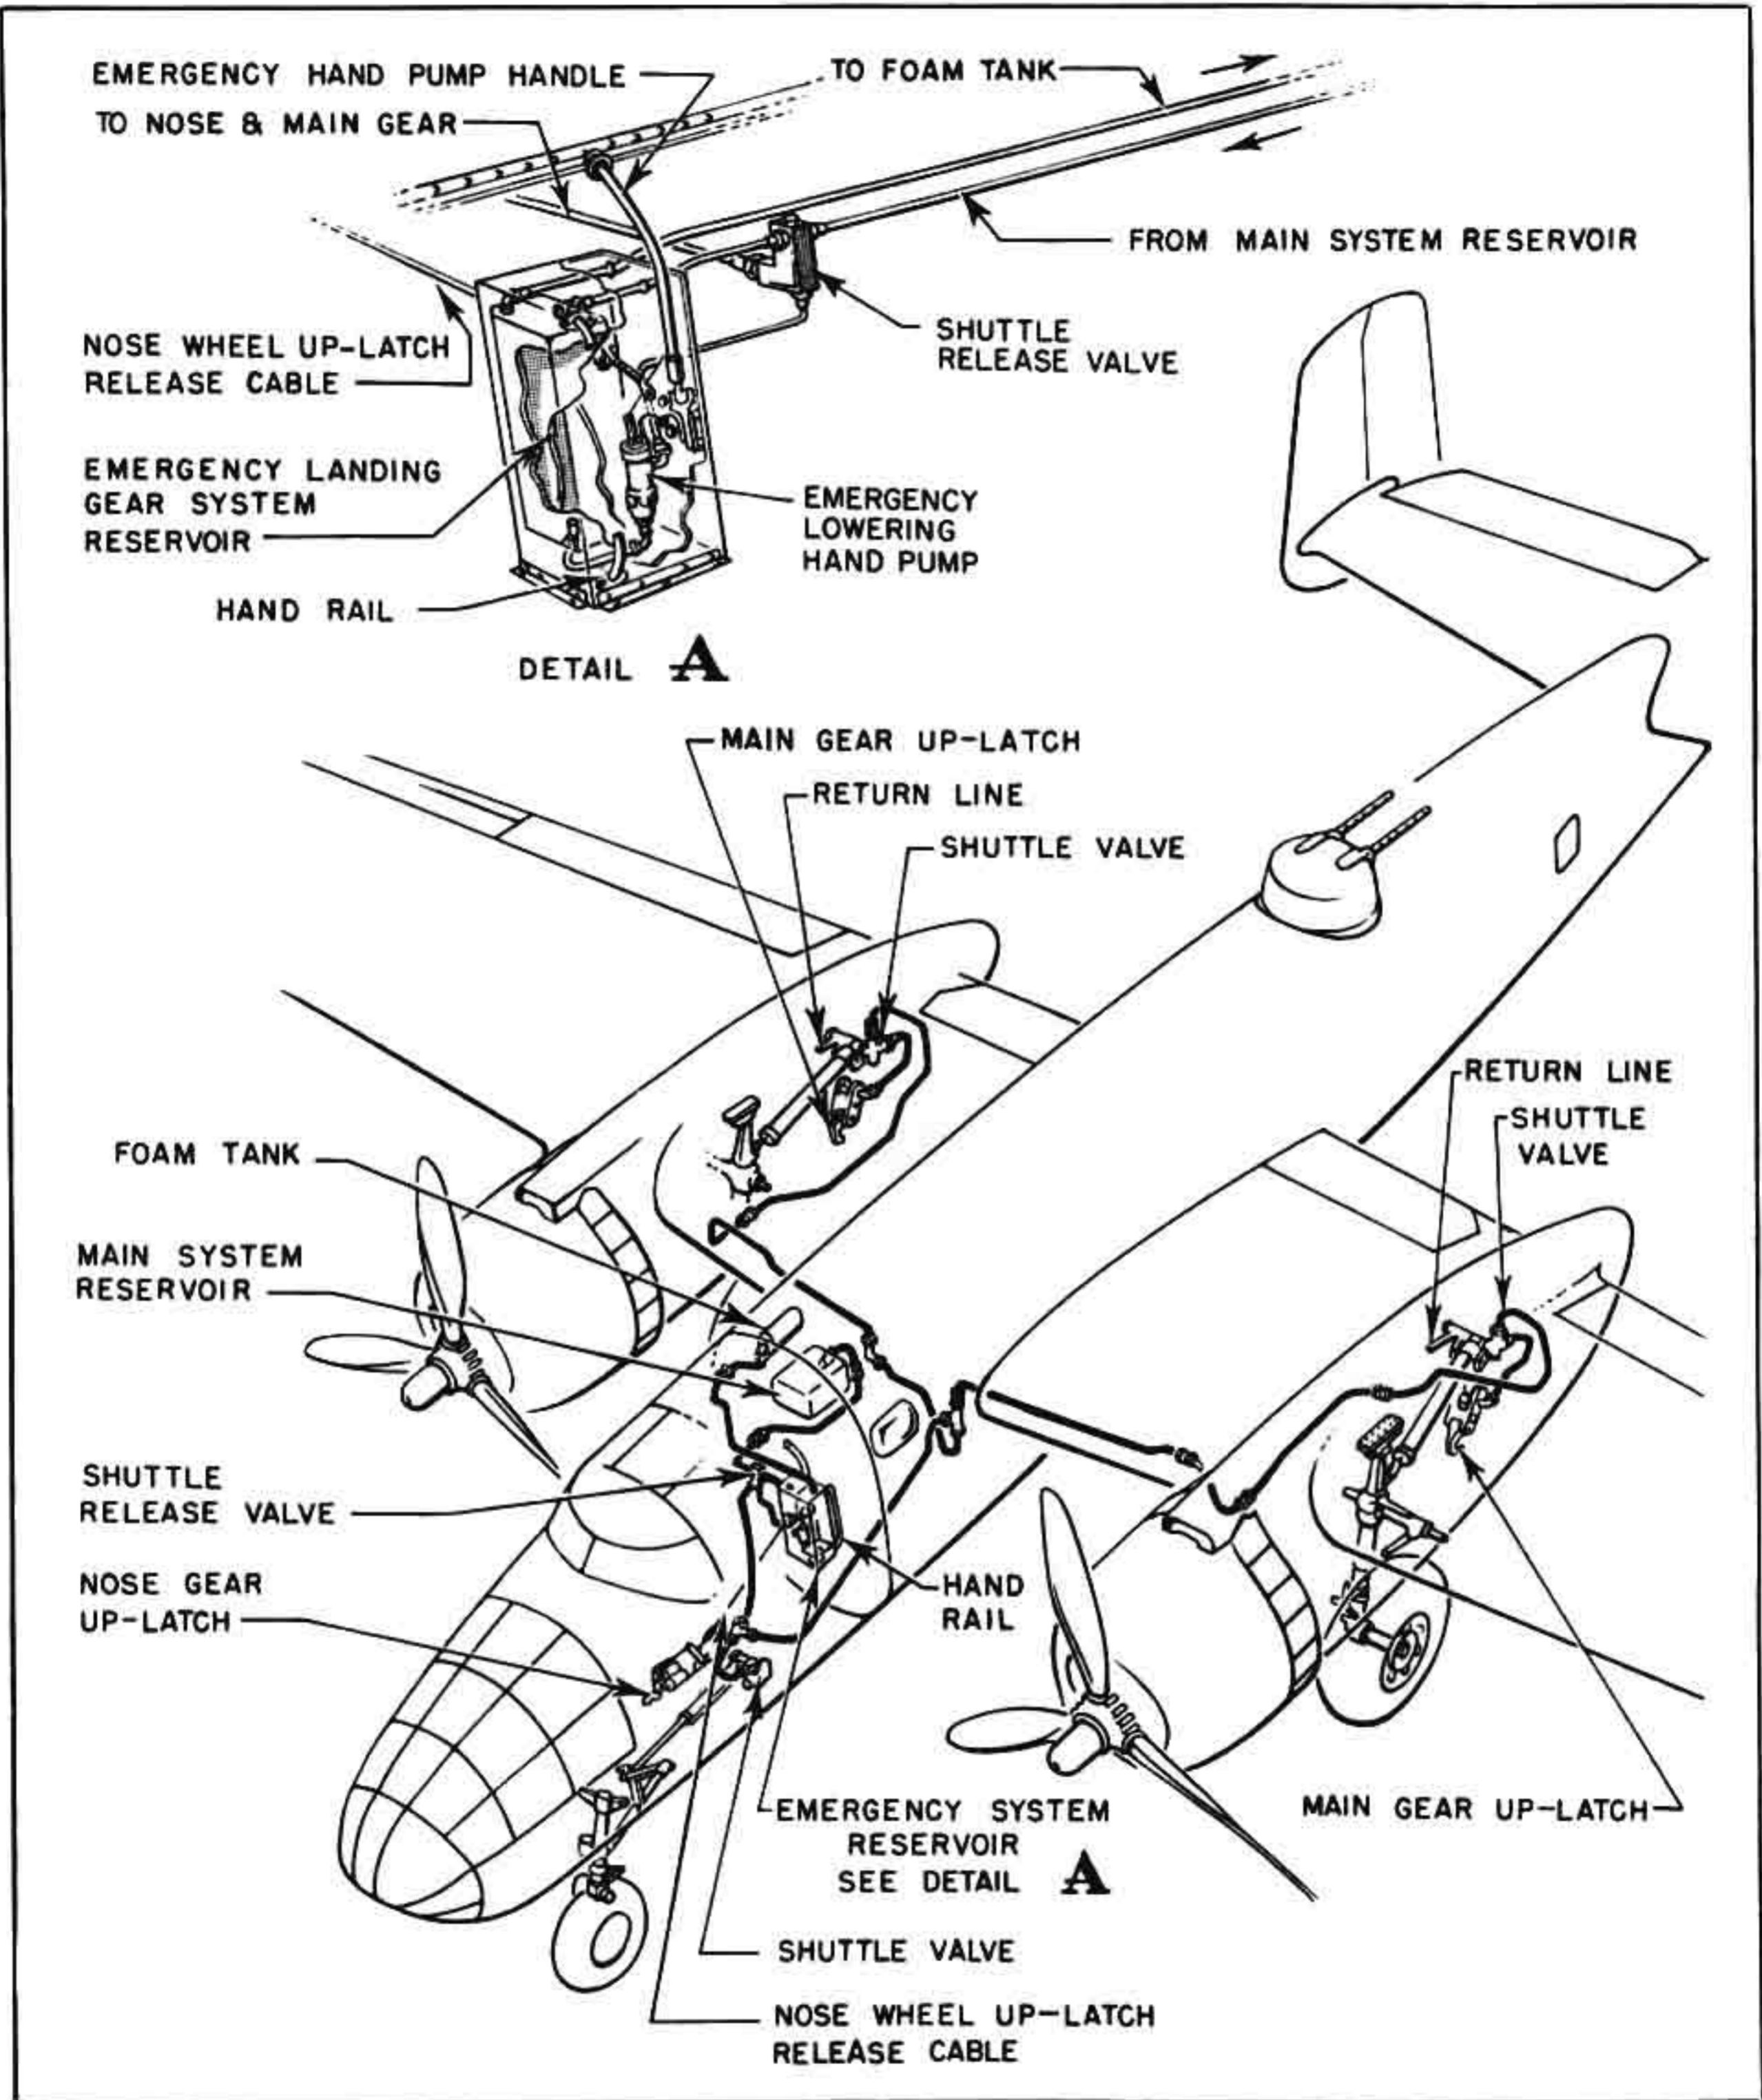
Hydraulic System—Landing Gear Emergency Lowering
